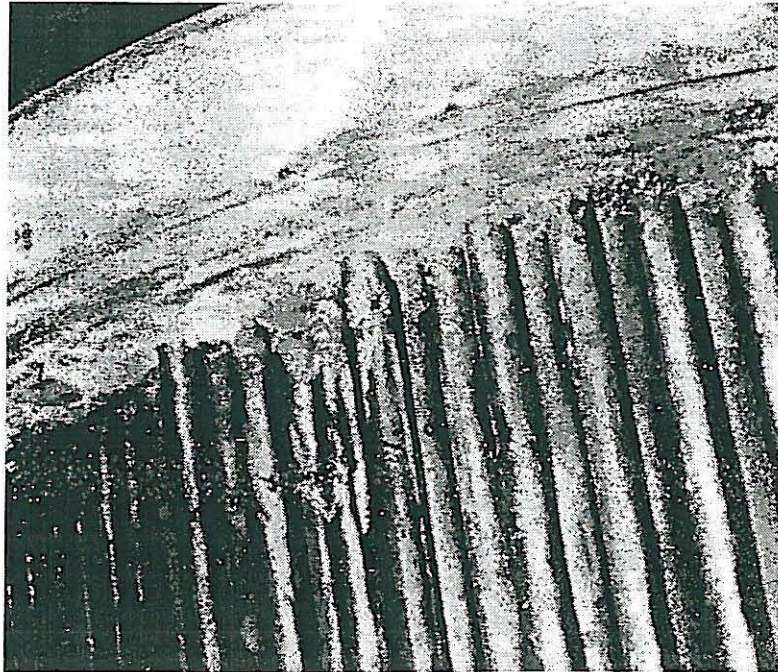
Stress corrosion cracking of type 304L stainless steel condenser tubes.
